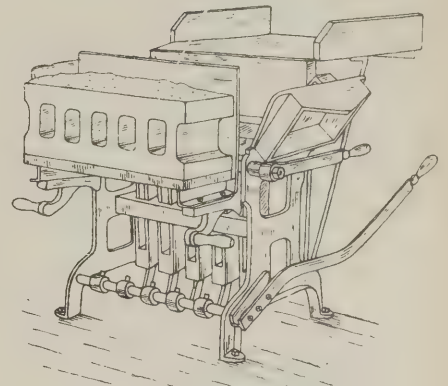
CONCRETE BUILDING BLOCK MACHINE.
